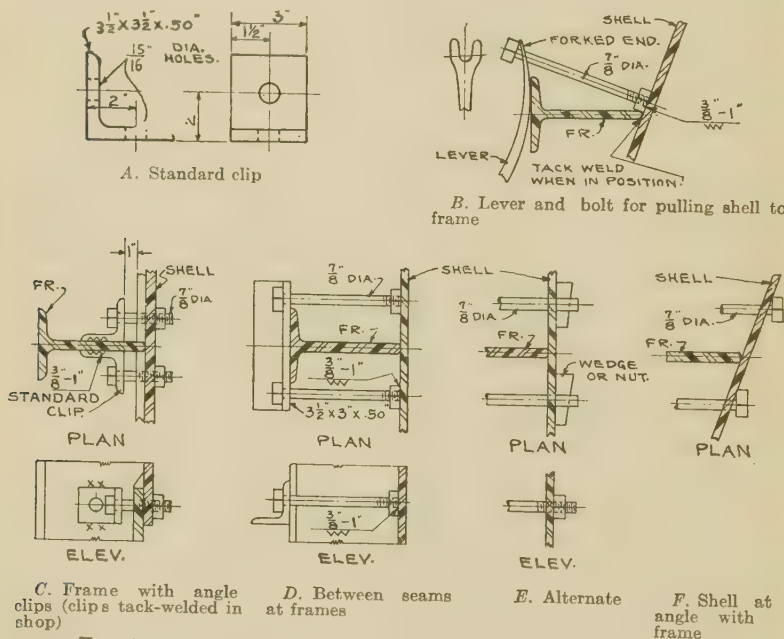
Assembly devices for welded ships and other structures.
